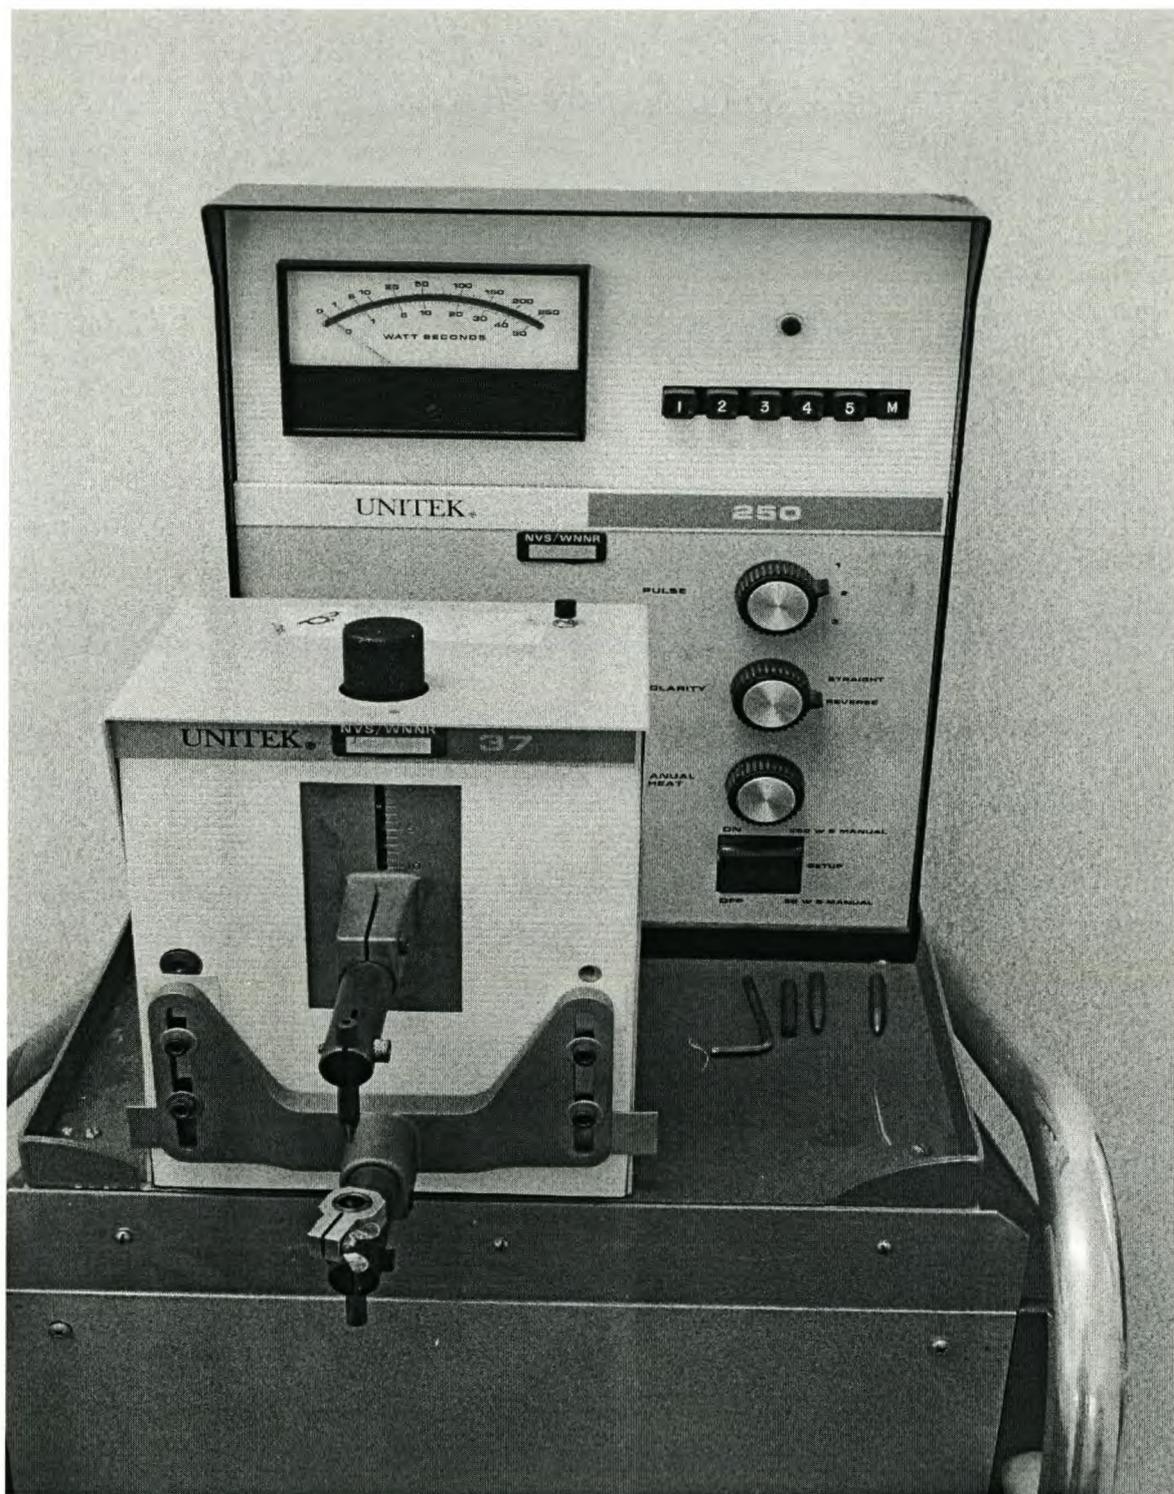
4 The spot-welding machine (top section).
